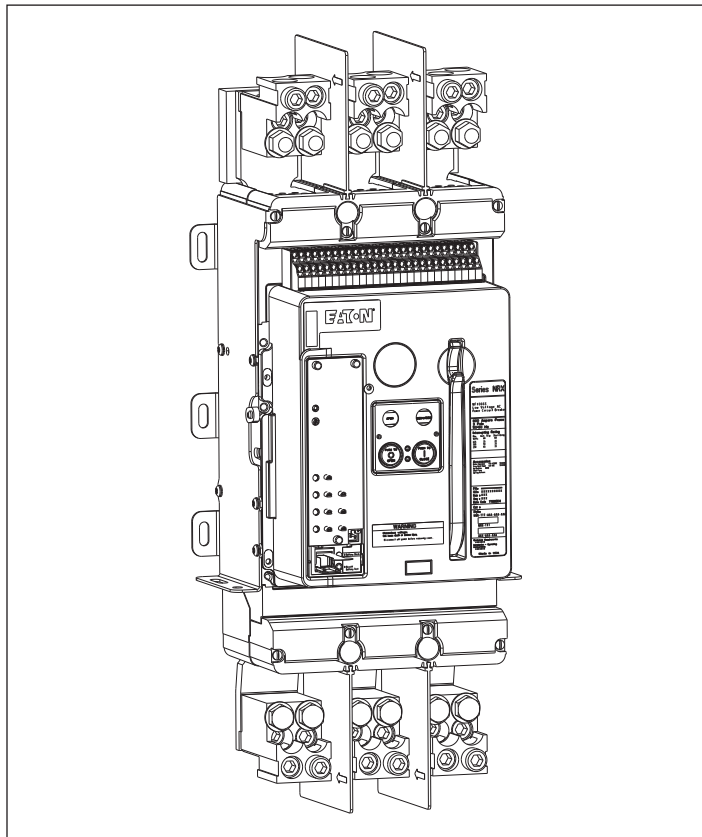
Step 7.3—Cable terminals connected onto bus extensions on both line and load side
